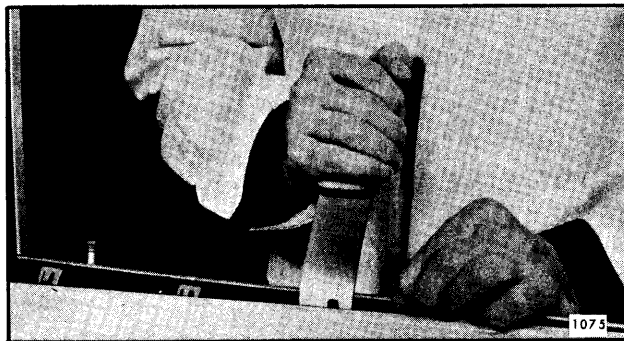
Clip Retained Glass Run Channel Inner Strip Assembly Removal
